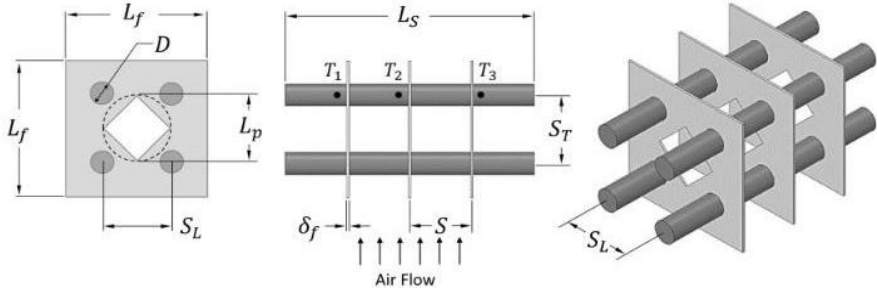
Detail drawing of Perforated Finned-Tube Heat Exchanger [1]
